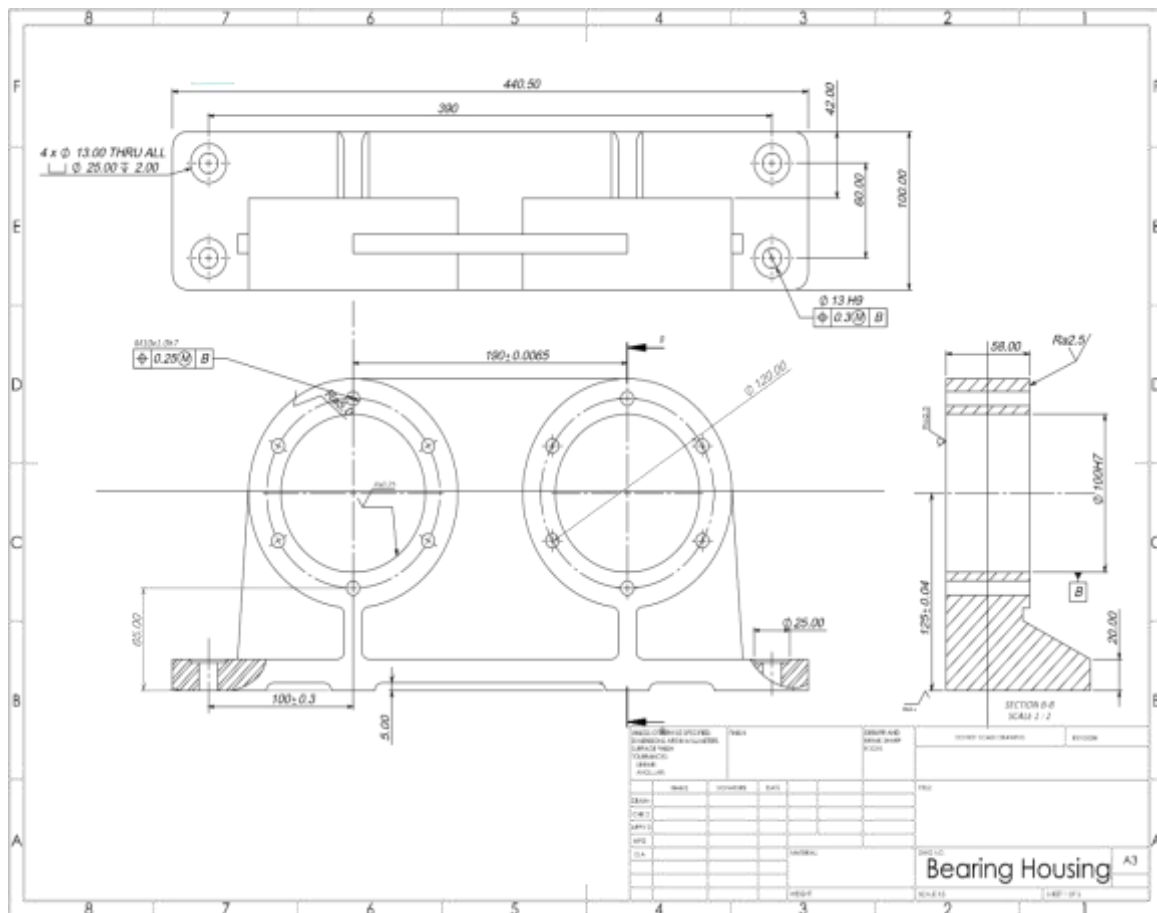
drawing for $\phi 100$ mm –H7 bearing housing
